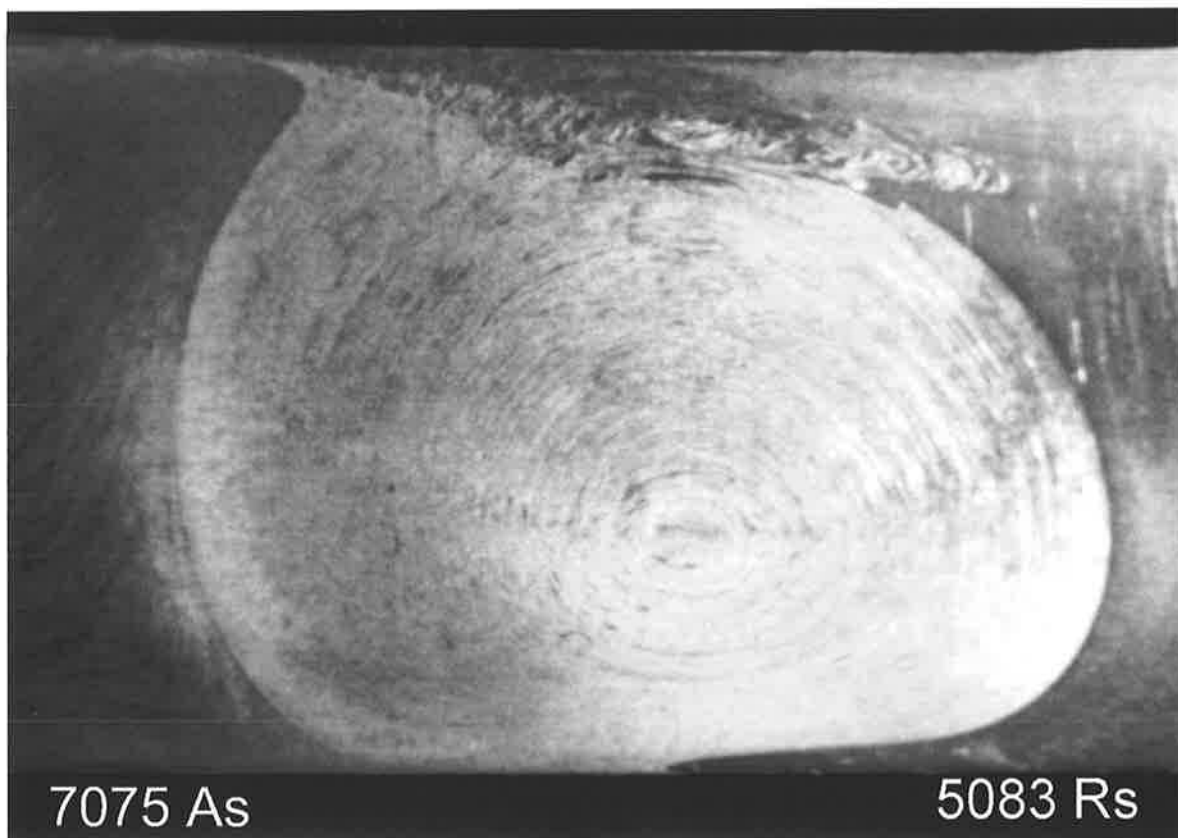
Weld macrograph of the dissimilar alloy weld 820A
